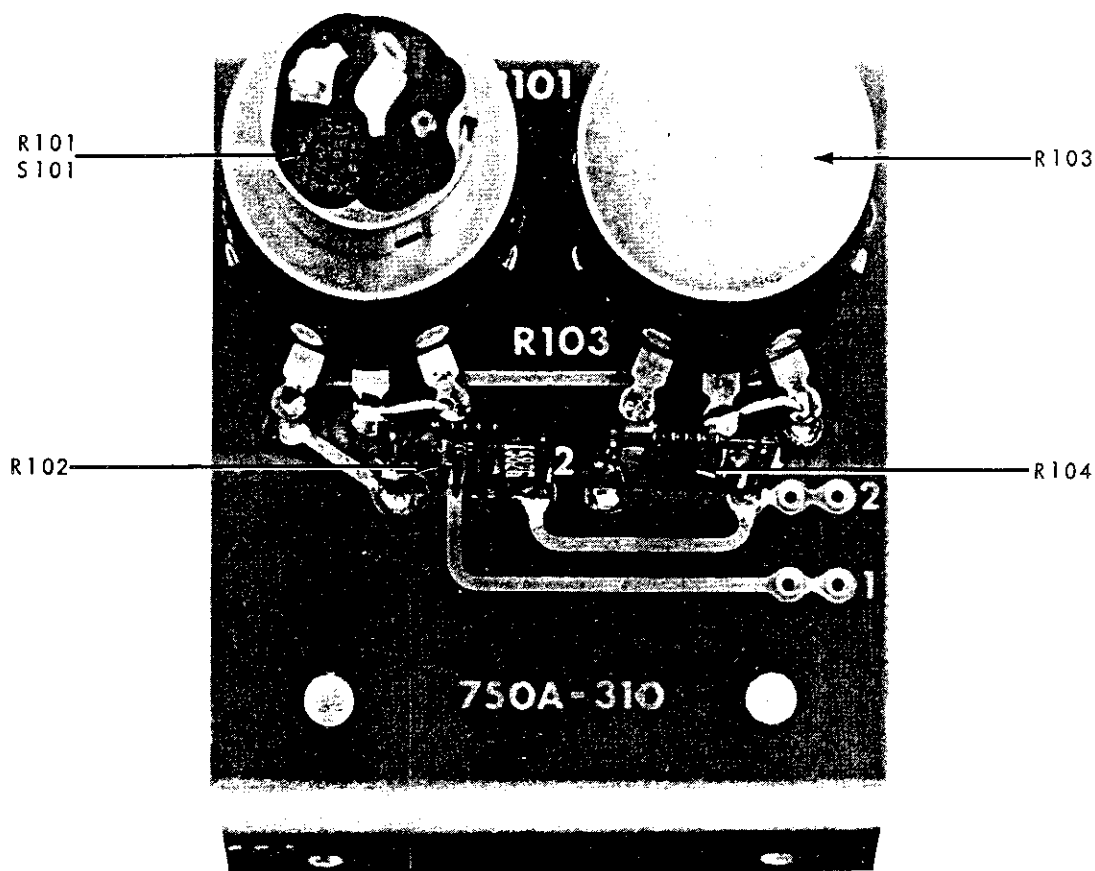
POT MOUNTING P/C ASSEMBLY
